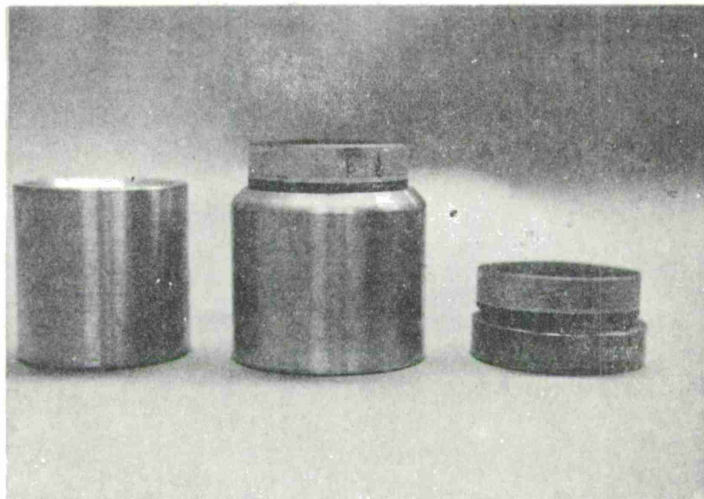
Backing Up Fiber Optic Faceplates Using Black Sealing Wax
